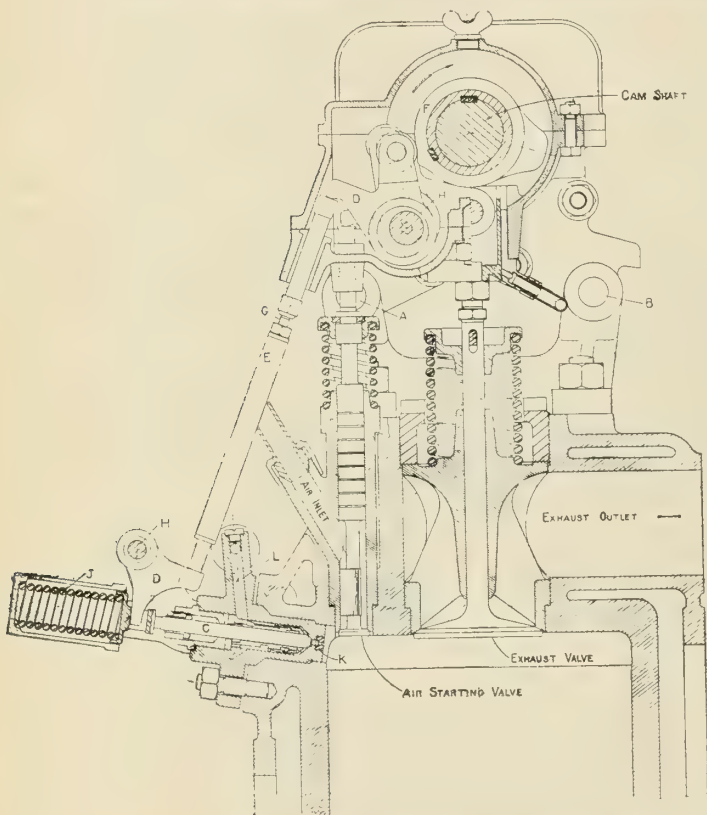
VALVE ARRANGEMENT IN CYLINDER HEAD
